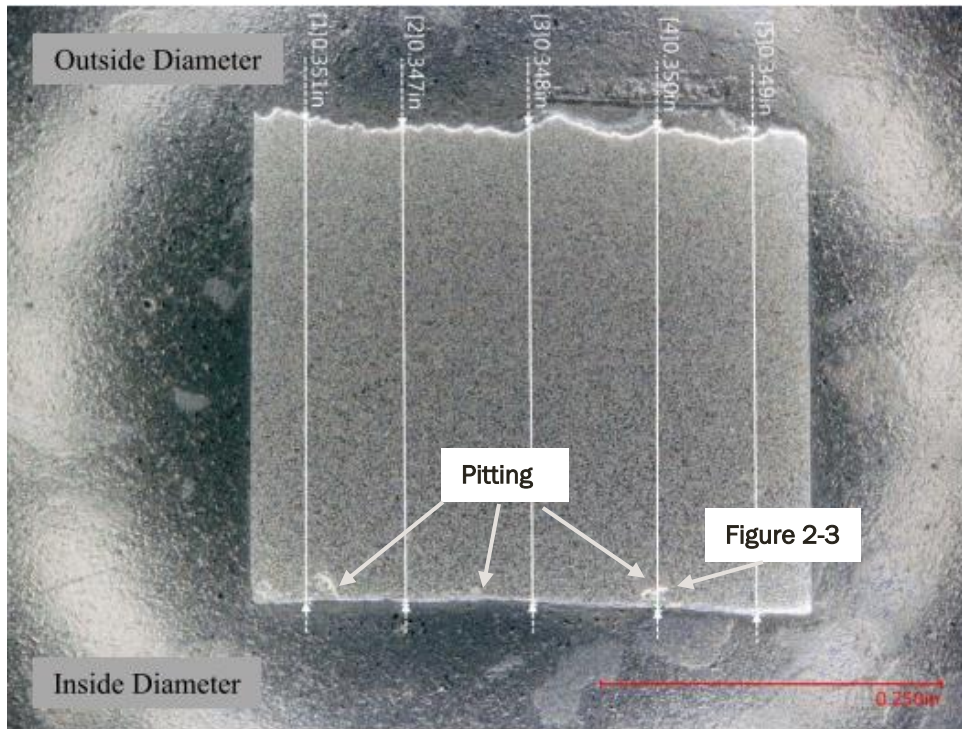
Radial Cross Section Showing Wall Thickness and Pits on Interior Surface
